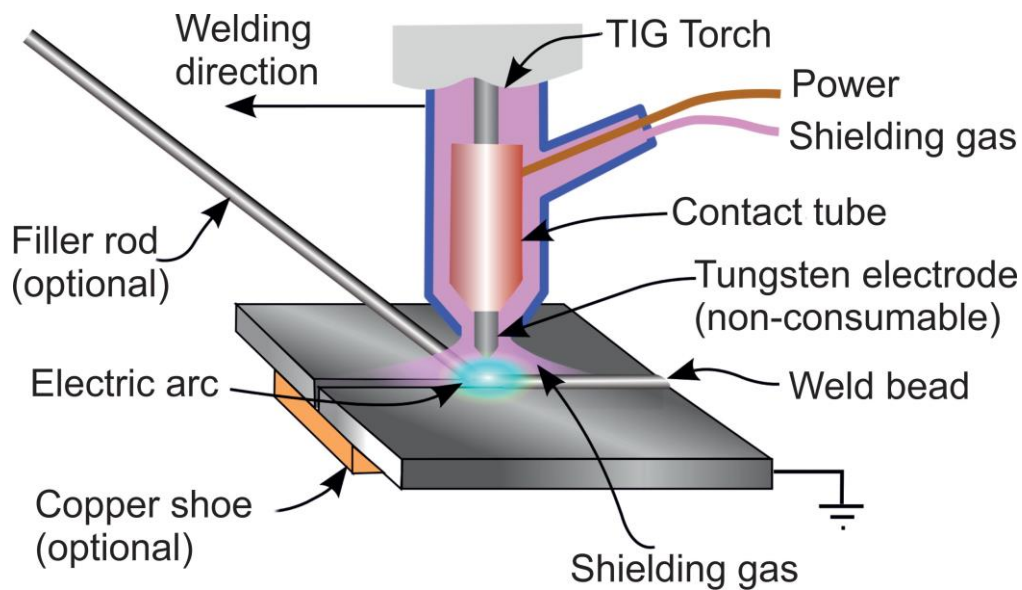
Schematic representation of tungsten-inert gas welding Modified and reprinted under Creative Commons License 2[28]
